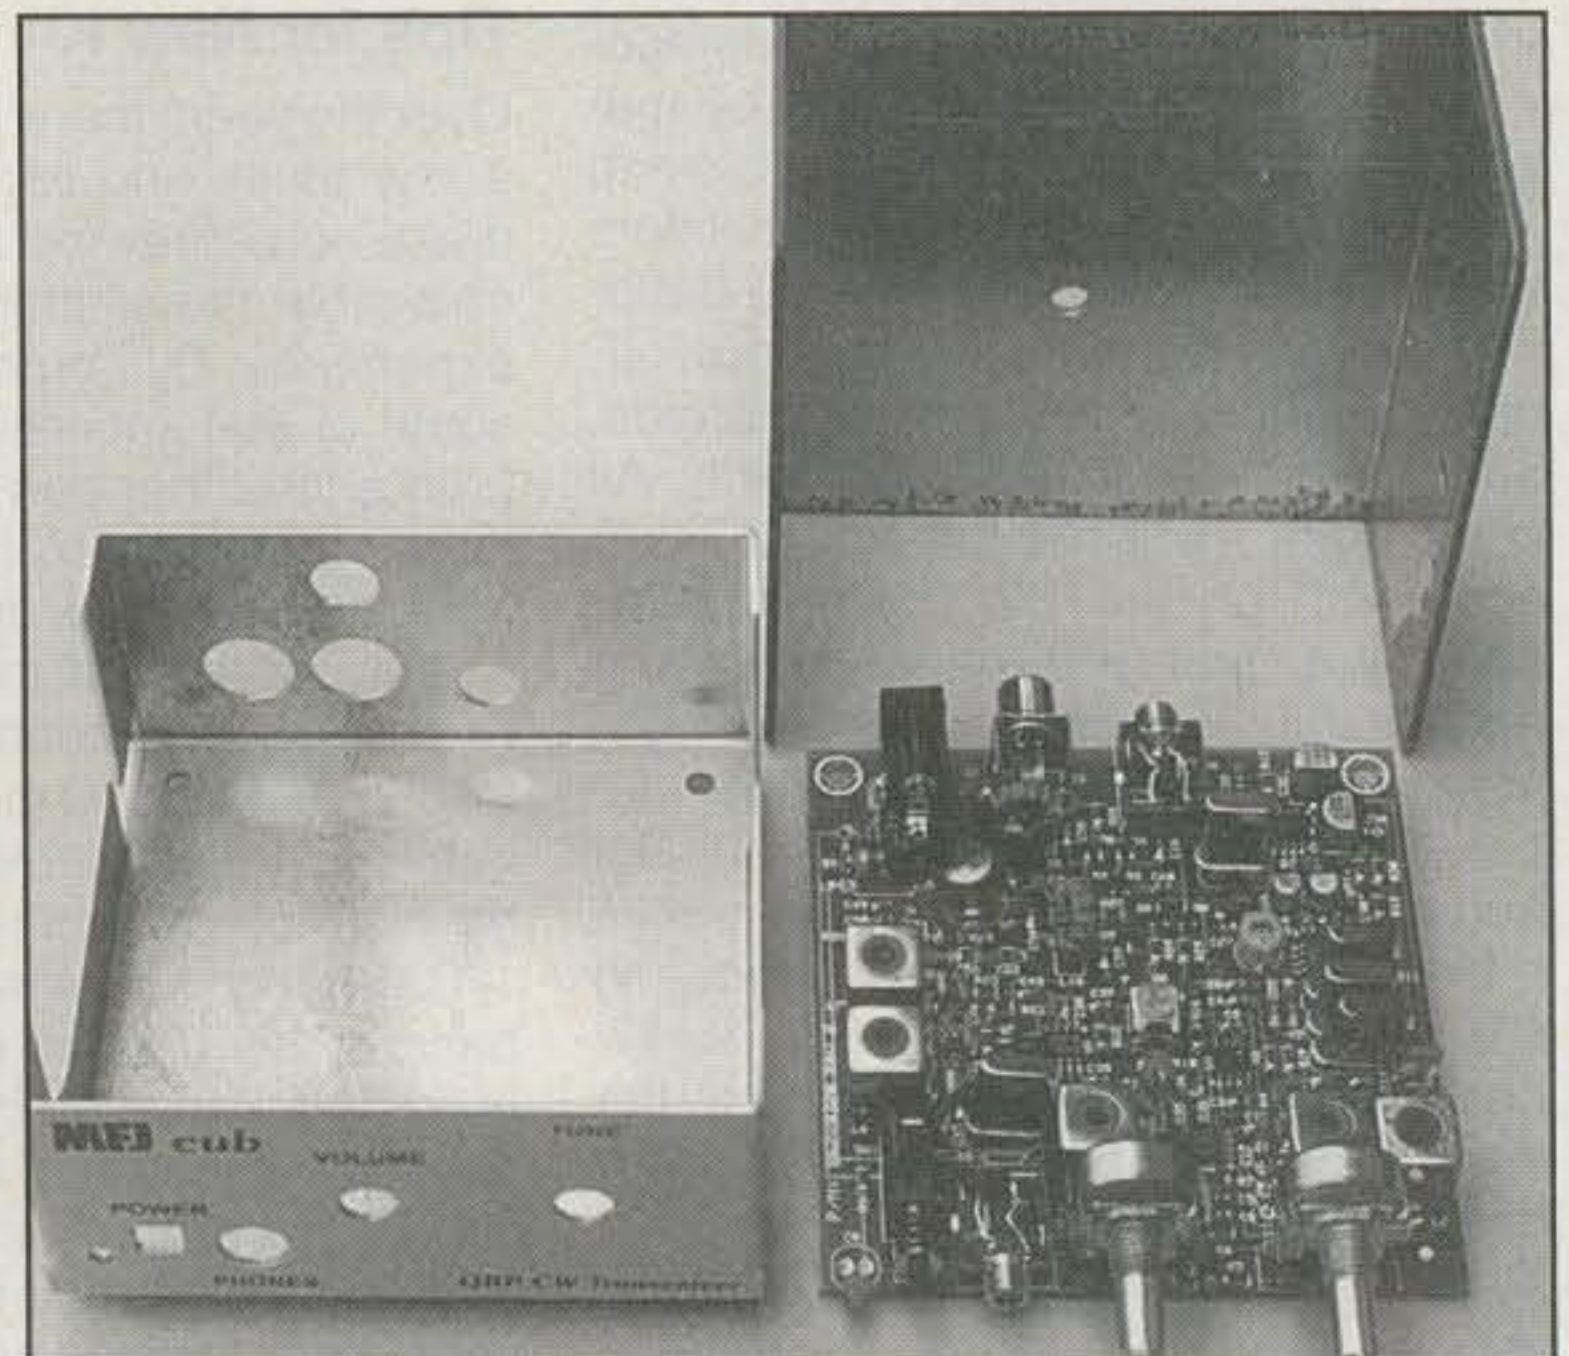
Another hour later and the fully assembled Cub is ready to slip into its enclosure. Notice all the controls, switches, and sockets are mounted directly on the PC board and no off-board wiring is necessary. Nice!
